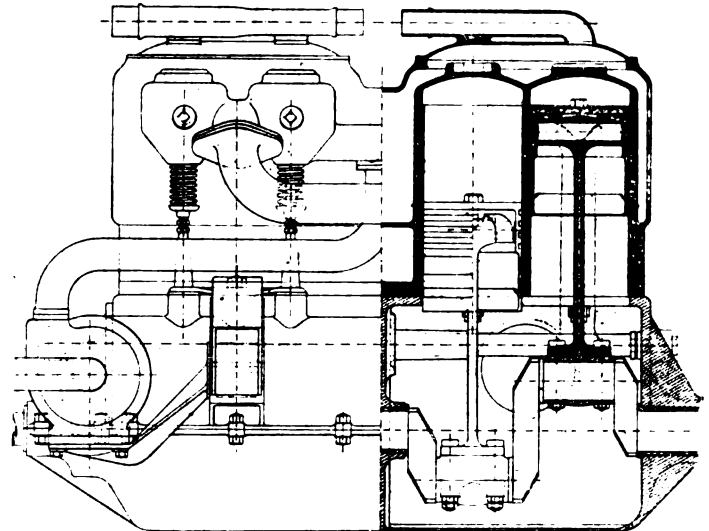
Part Sectional Elevation of Dorwald Engine.
